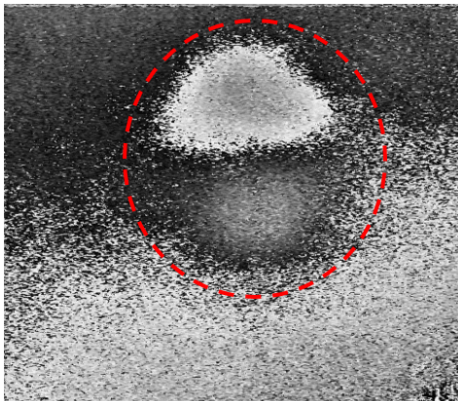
Result of shearography inspection of the prototype on test specimen (i).
